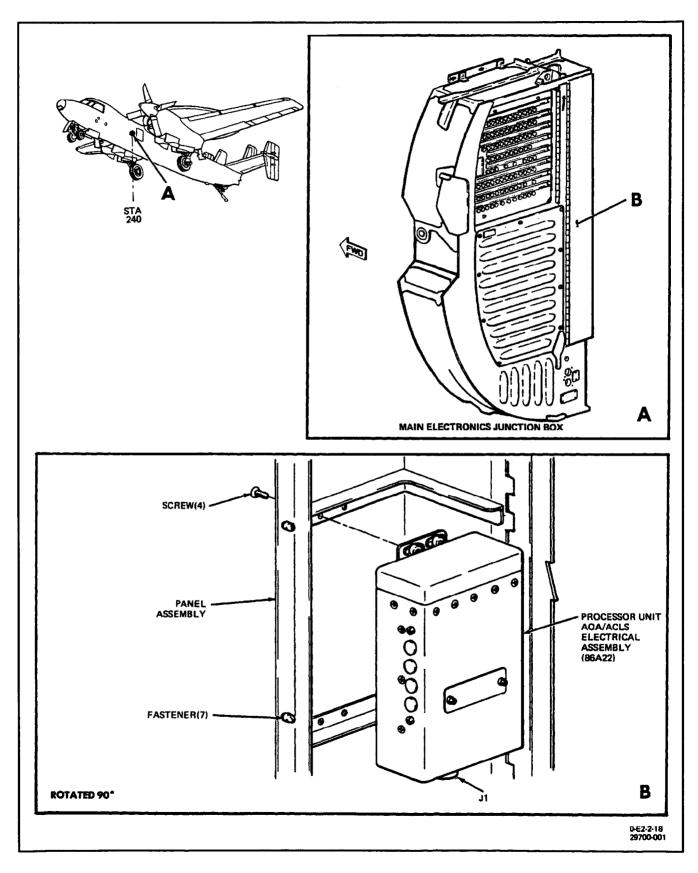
Removal and Installation of Processor Unit AOA/ACLS Electrical Assembly
